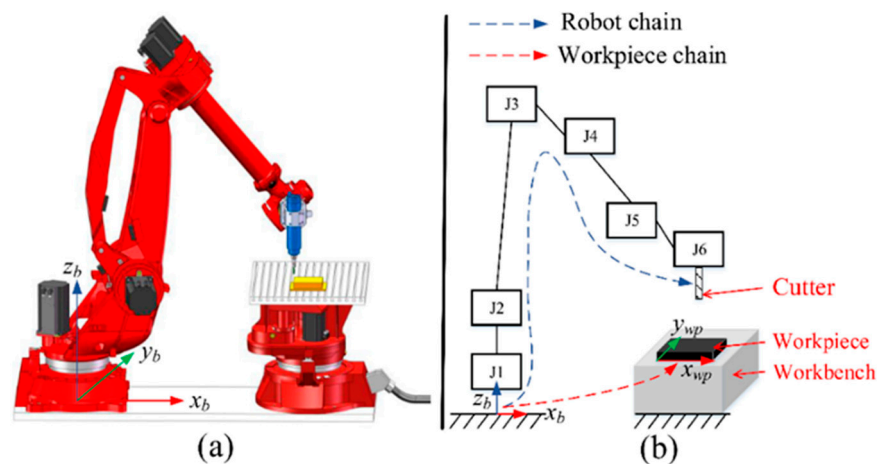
Kinematics of robotic machining environment: (a) 3D model of robot cell; (b) comparison of robot and workpiece kinematic chains [38].
